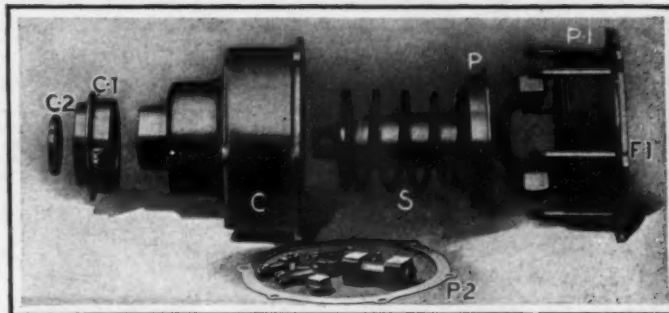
Showing the various component parts constituting the Locomobile clutch
